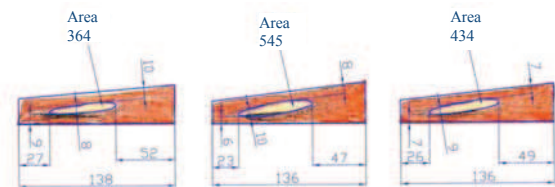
Examples of the gear wheel contact areas with typical dimensions
